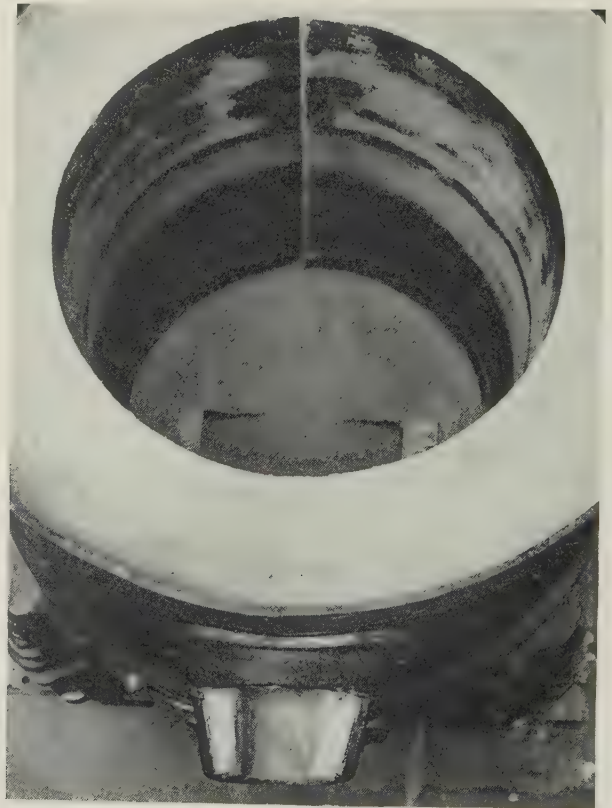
Ramming of Furnace Completed and Body Former Removed.
